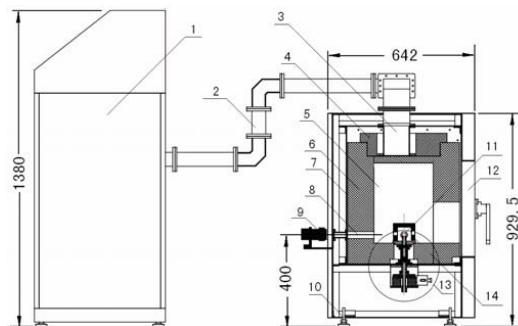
The assembly mechanical drawing of the SR-CT microwave sintering equipment
